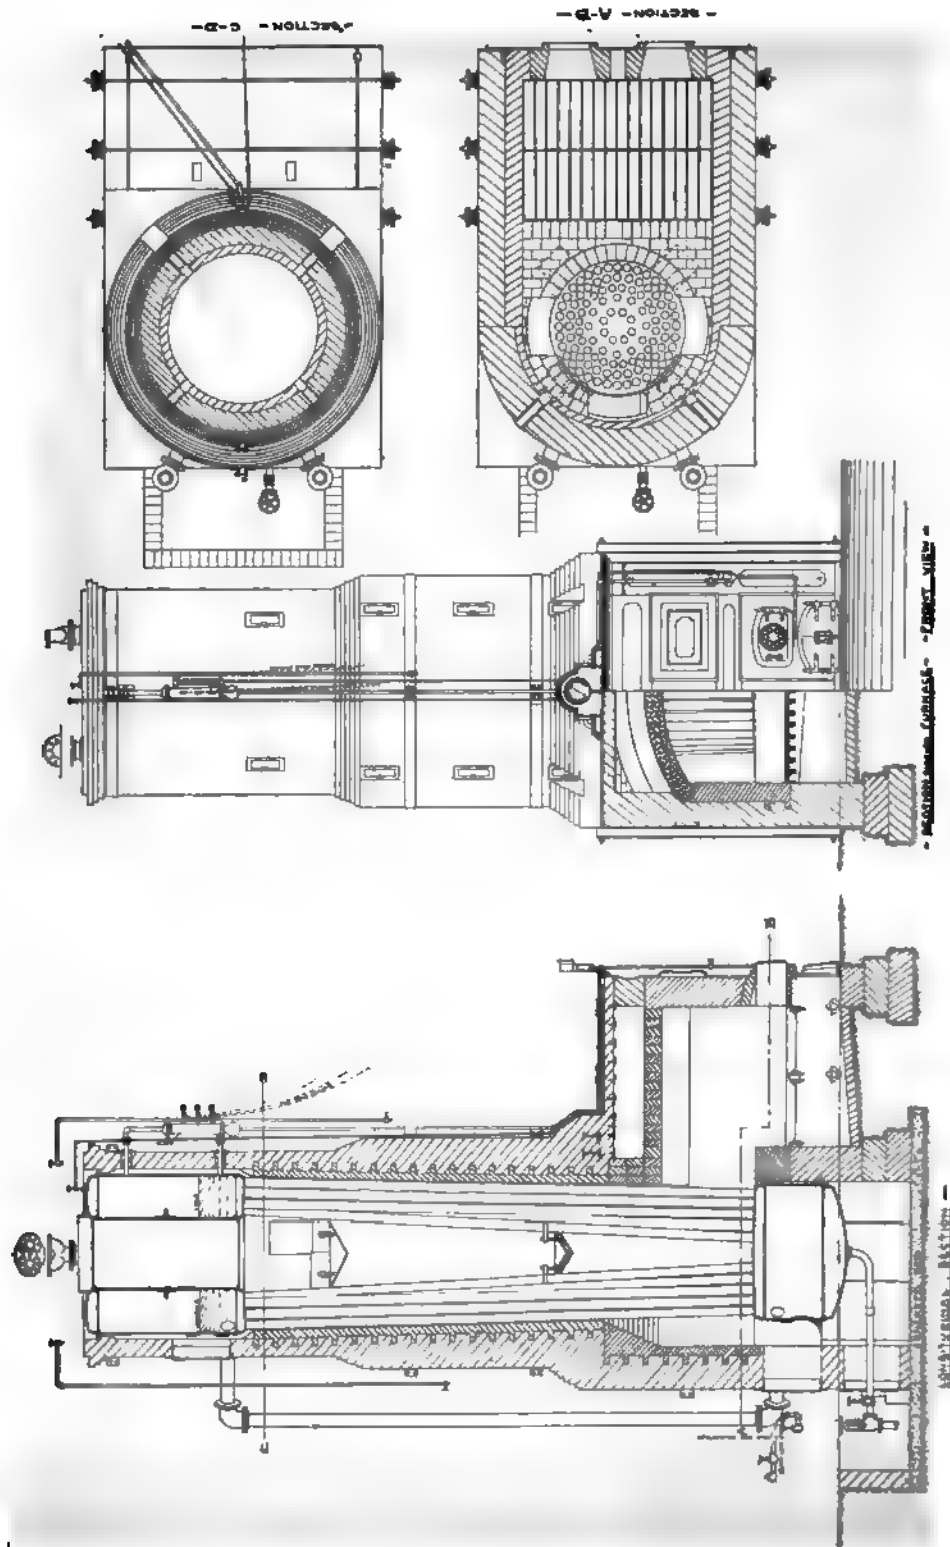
250 H.P. CANAD UPRIGHT WATER-TUBE BOILER, BUILT BY THE AULMAN-TAYLOR MACHINERY CO., MANSFIELD, O.
